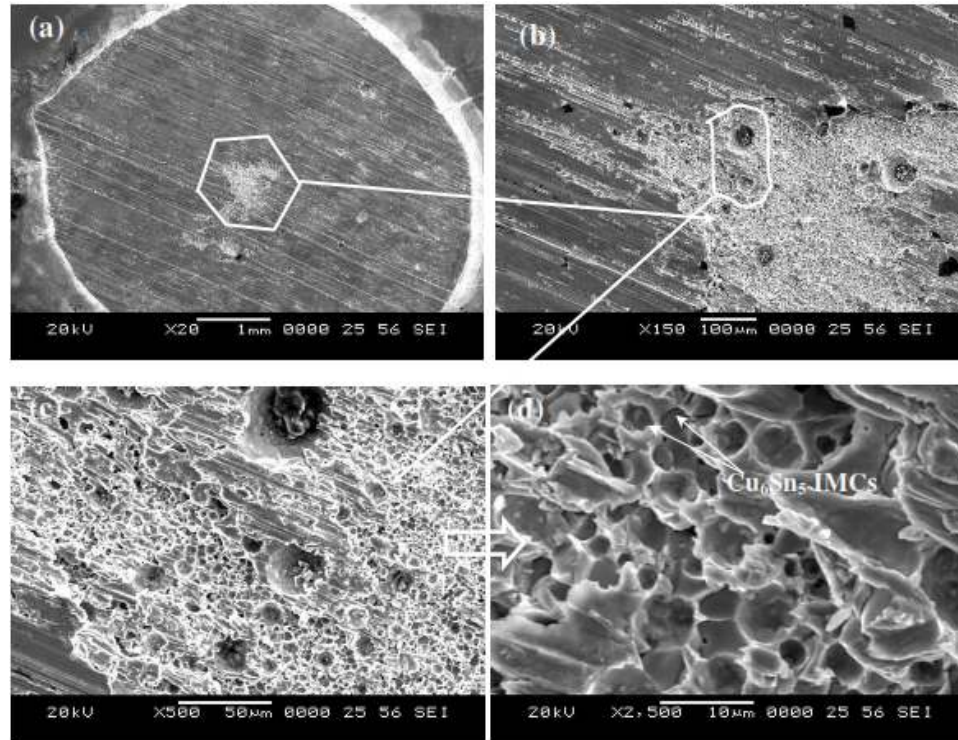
SEM micrographs of the fractured surfaces of Sn-0.7Cu solder on smooth Cu substrate surface (a), (b) at lower magnification (c), (d) at higher magnification
